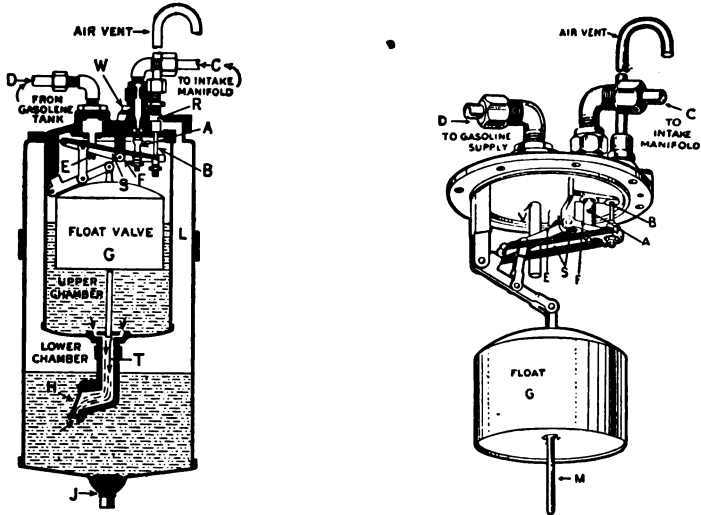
Sectional view of the vacuum feed tank used on many automobiles
